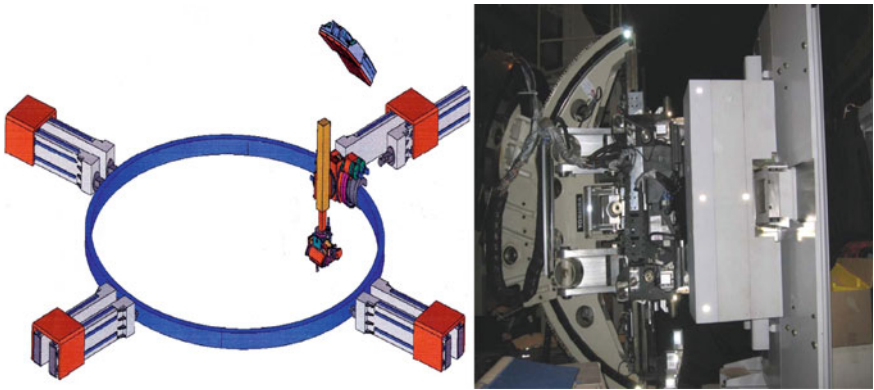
Blanket RH trials using the IVT and manipulator
